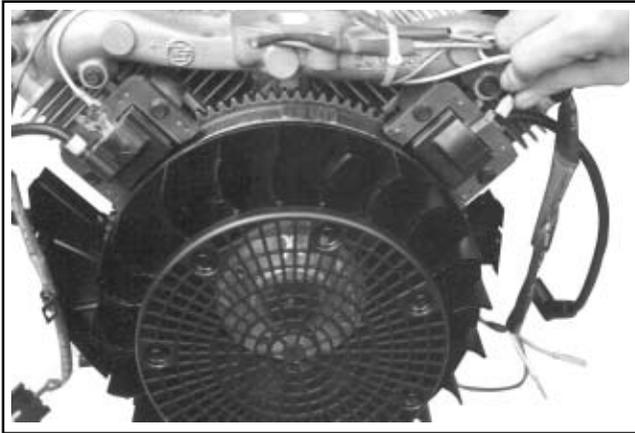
Connecting Kill Leads on Standard Ignition Modules.
